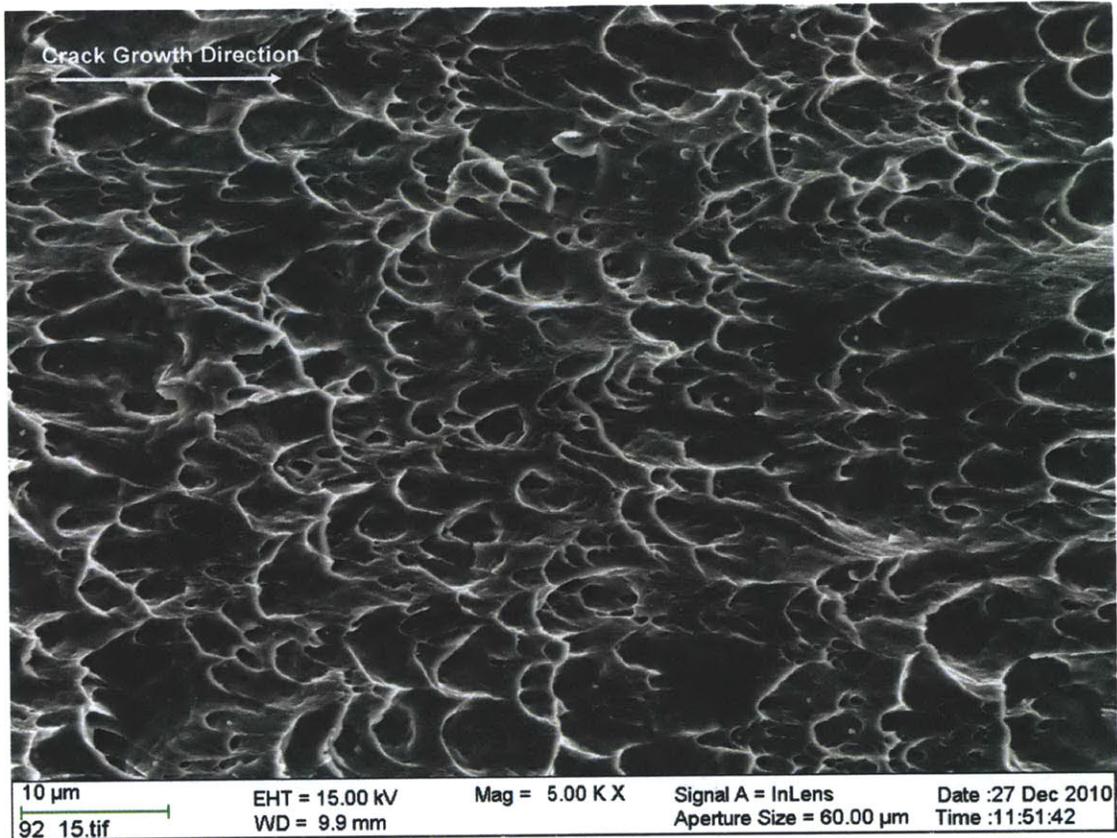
Ductile tearing in 288°C air condition. Impact of MnS inclusions is clearly visible.
